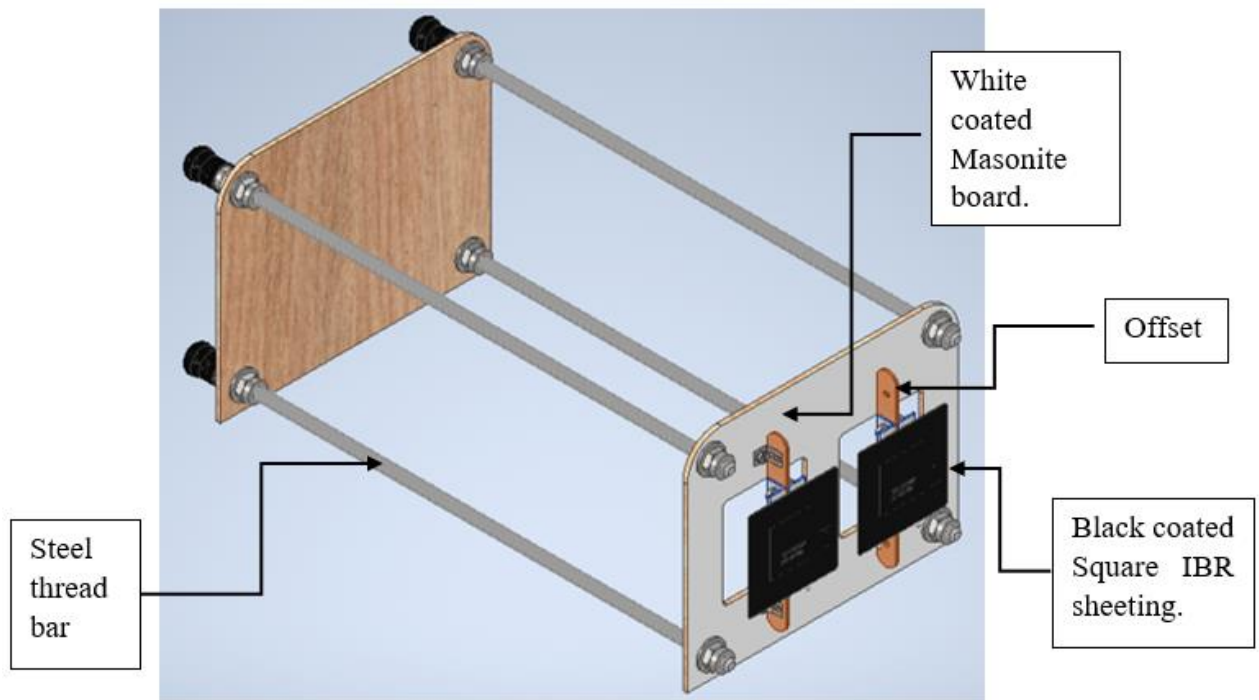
CAD drawing isometric view of the testing jig design with components
